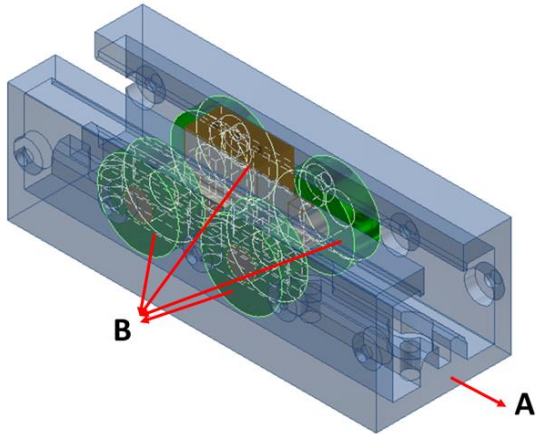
A) Linear rail. B) The sliding carriage and 4 bearings on the sides.
